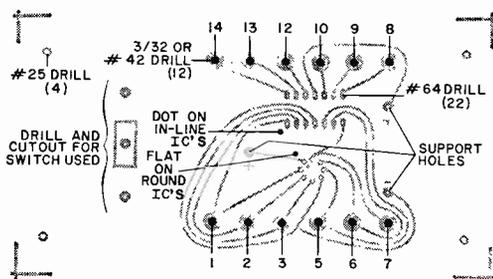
Parts layout for the socket-contact board. Note the three support holes for oscillator board.
